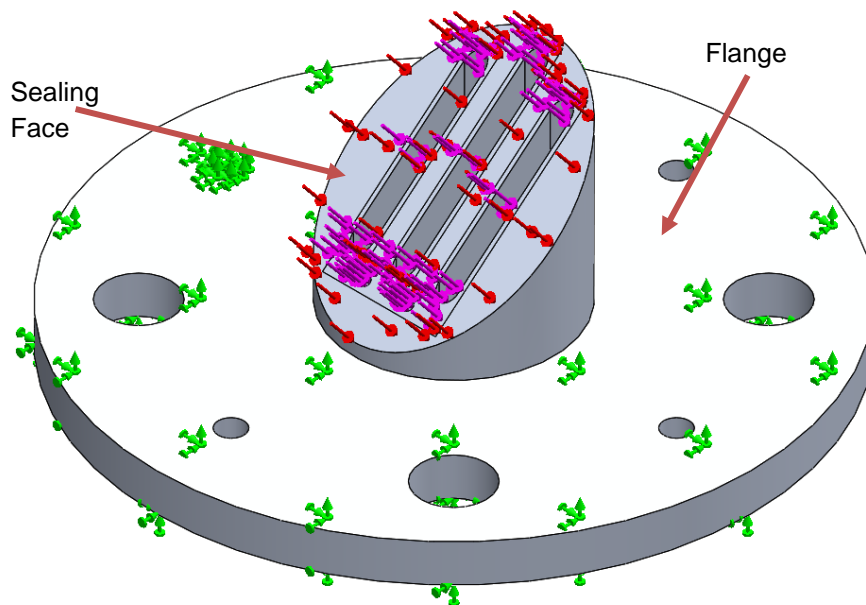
Fixtures and External Loads Setup on the Valve Base
